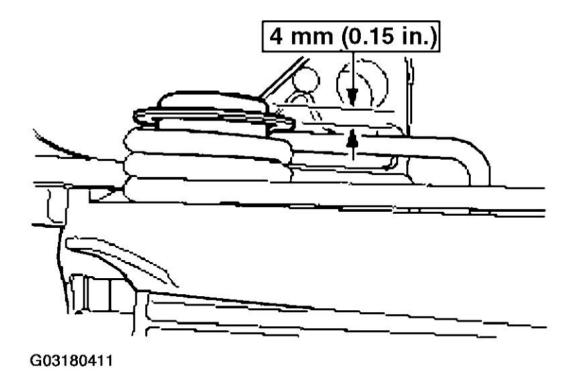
Installing Spring Retainer Courtesy of FORD MOTOR CO.
